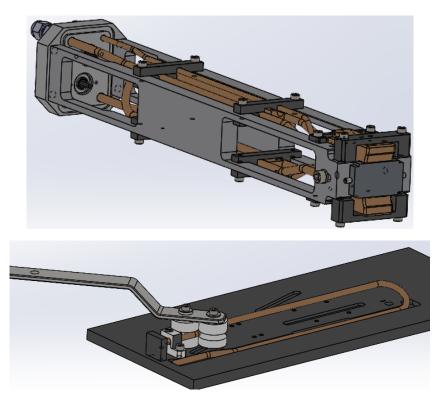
CAD model of brazing assembly (up) and water tubes shaping (down)
